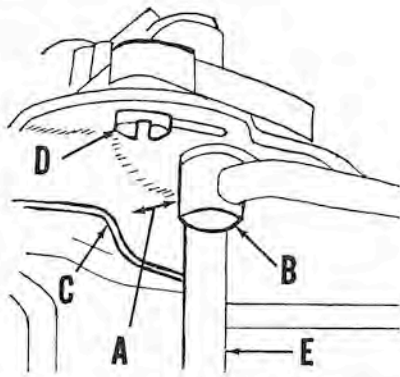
A — Synchronizing cam adjustment on 2 cylinder Merc 350. Distance A should measure 9/32-inch. Refer to Text.
